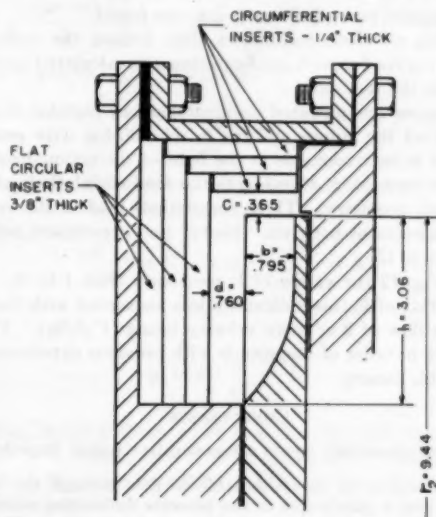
OPEN CHANNEL IN WORKING SECTION AND MAJOR DIMENSIONS OF EXPERIMENTAL UNIT
